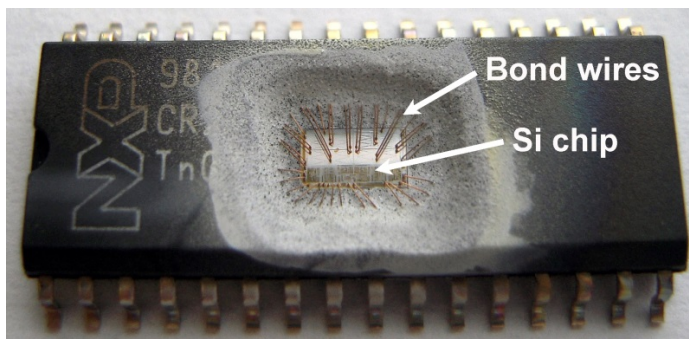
Inside an IC package. Once the epoxy molding compound encapsulation material is removed, the chip and bond wires inside the IC package can be seen.
